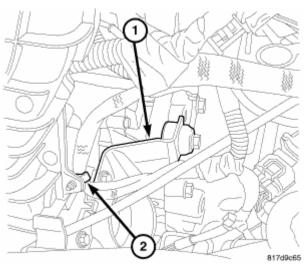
Throttle Body Support Courtesy of CHRYSLER LLC
